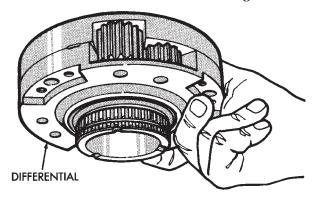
Installing Mainshaft Bearing Rollers and Spacers
